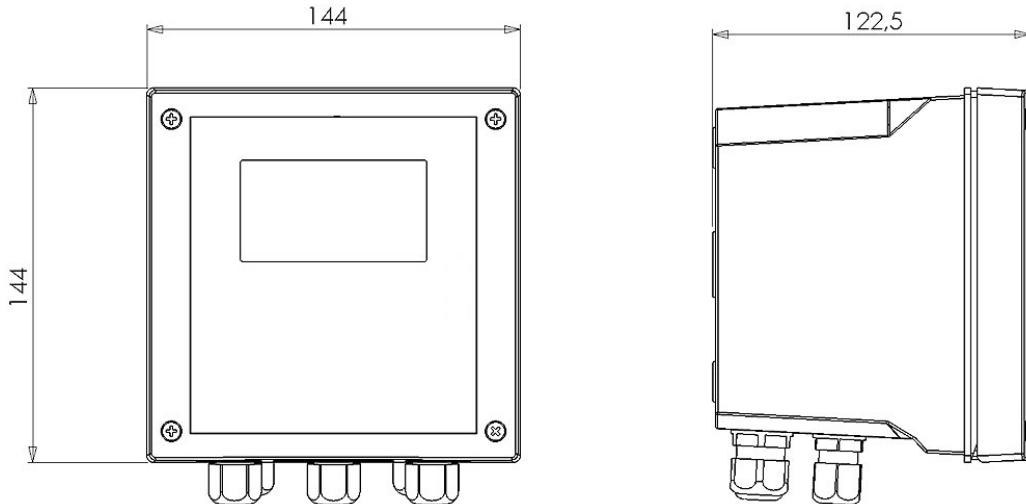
Dimensions and encumbrance of the wall-mounted control unit
